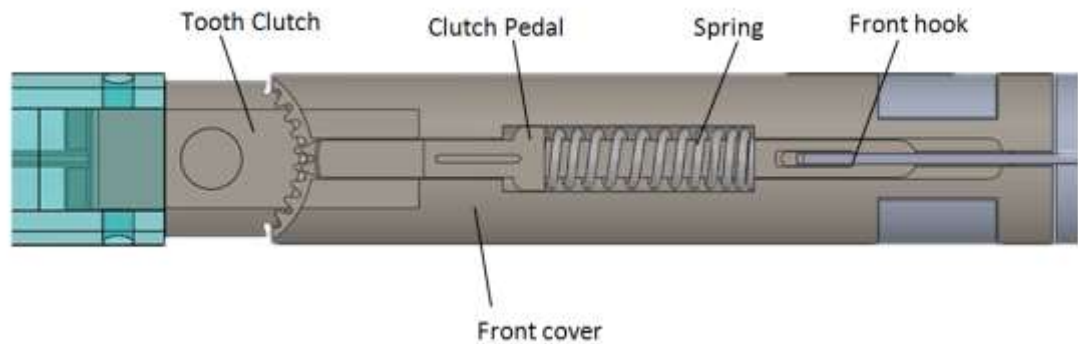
Front view of the front of the clutch-spring mechanism.
